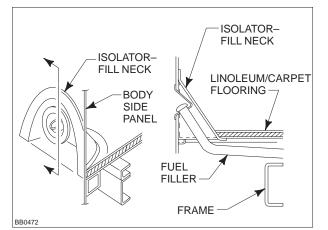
FIGURE A - BODY MOUNTED FUEL FILLER OPENINGS
